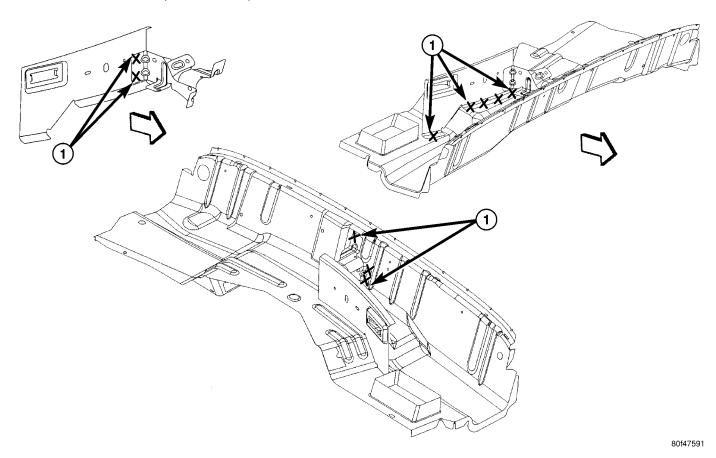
WINDSHIELD WIPER REINFORCEMENT GUSSET
